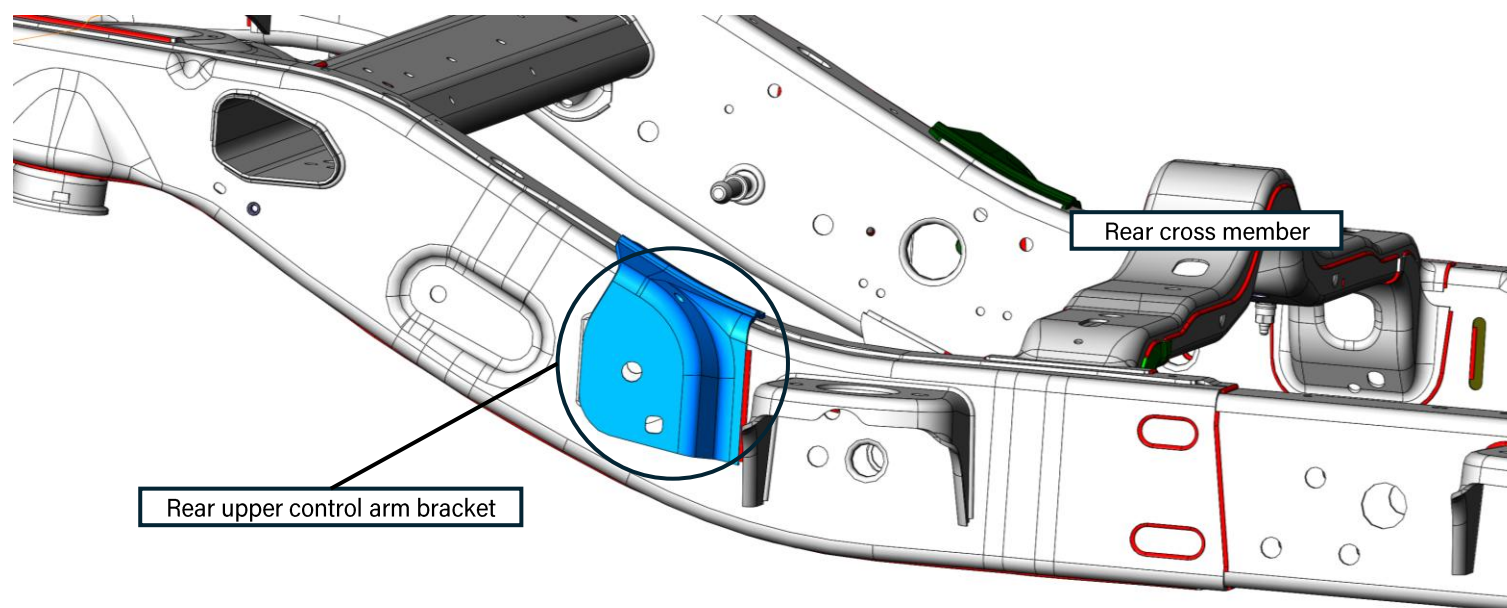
CAD model of original rear upper control arm bracket location (rear lower bracket already removed)
